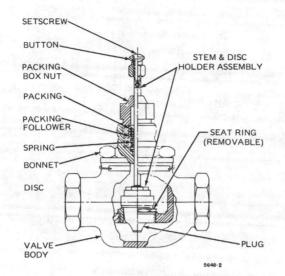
Cutaway of V5011 Threaded Body Valve.
